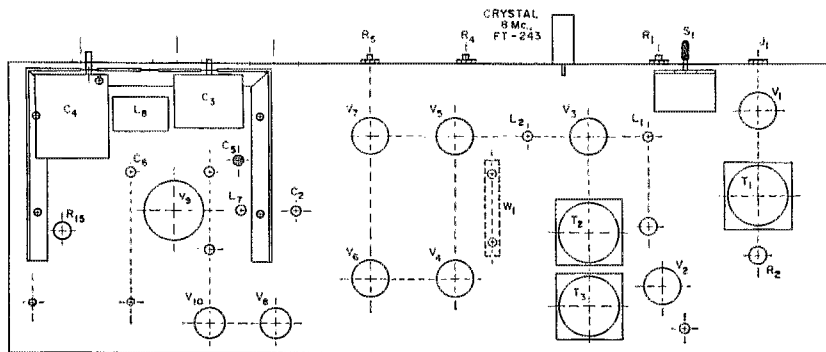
Top-of-chassis layout of the 6-meter s.s.b. transmitter. This drawing is to scale and may be used for layout dimensioning;  $\frac{1}{4}$  inch in the drawing above equals one inch of actual chassis size.
